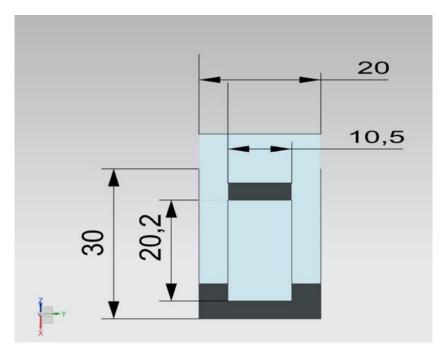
3D view of designed seating jig. (millimeter was the unit of the linear measurements)
